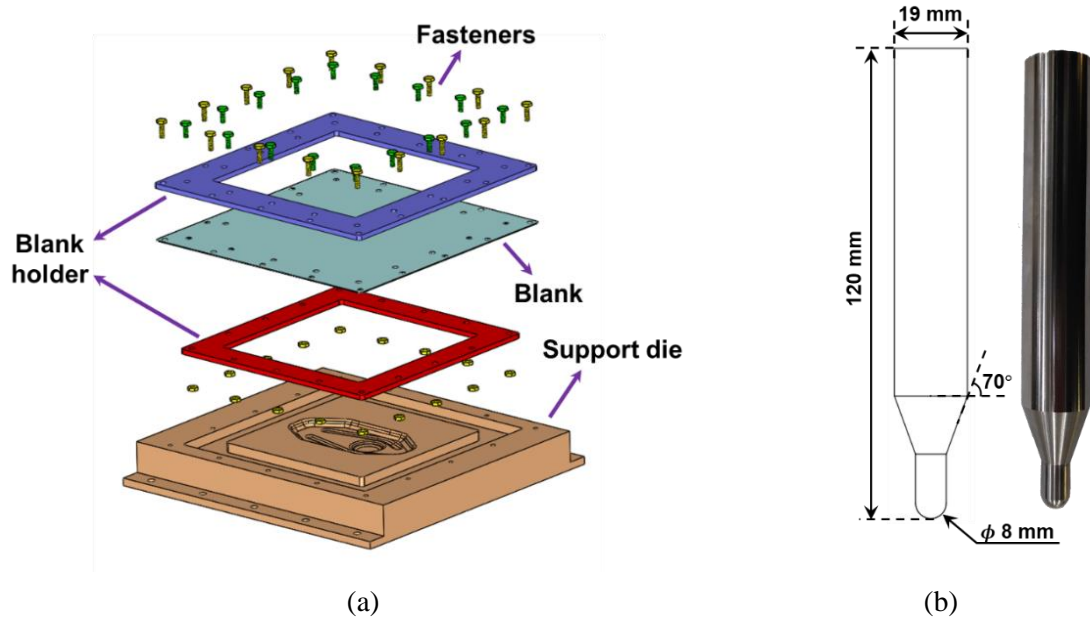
(a) Schematic of the initial blank clamping setup in the CNC machine; (b) tool geometry designed and manufactured for the TPIF experiments with 8 mm tip diameter
